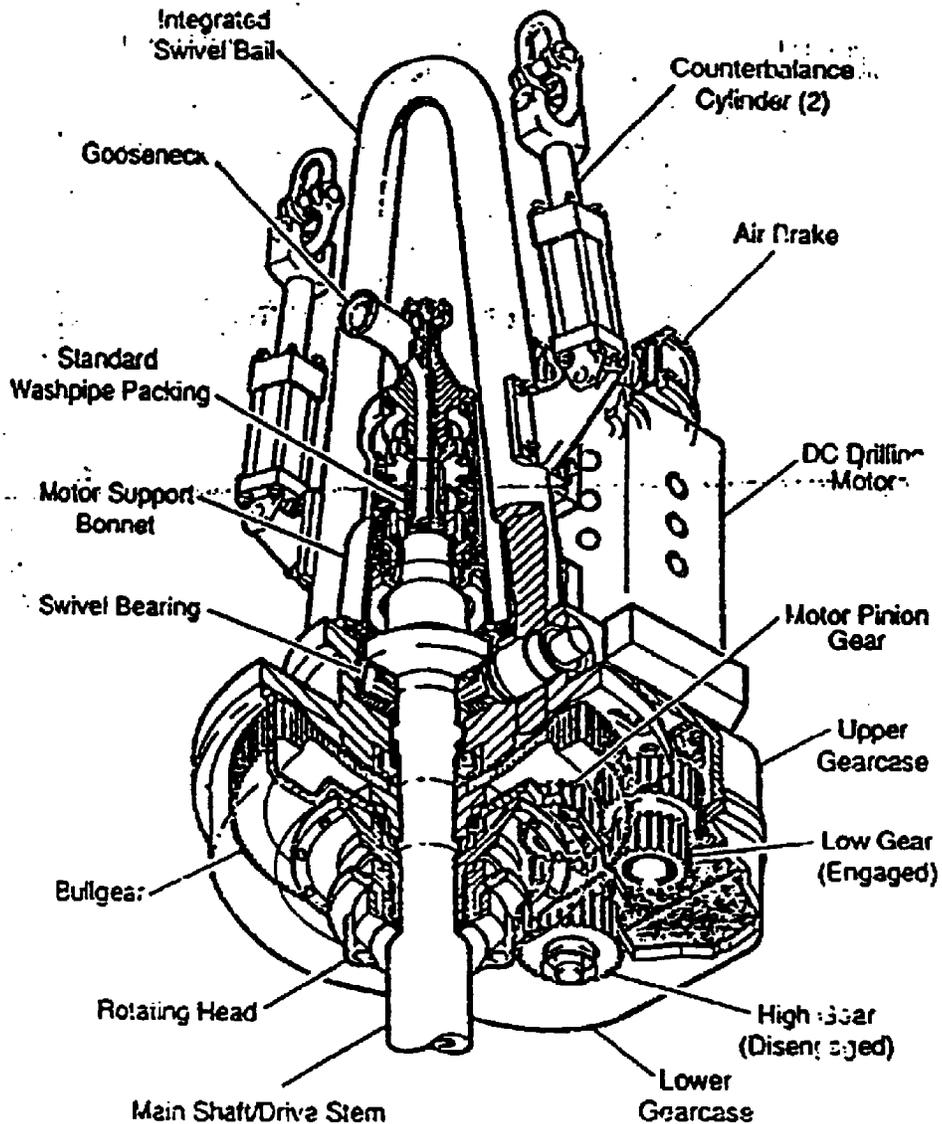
Top Drive Motor and Swivel Housing Assembly
